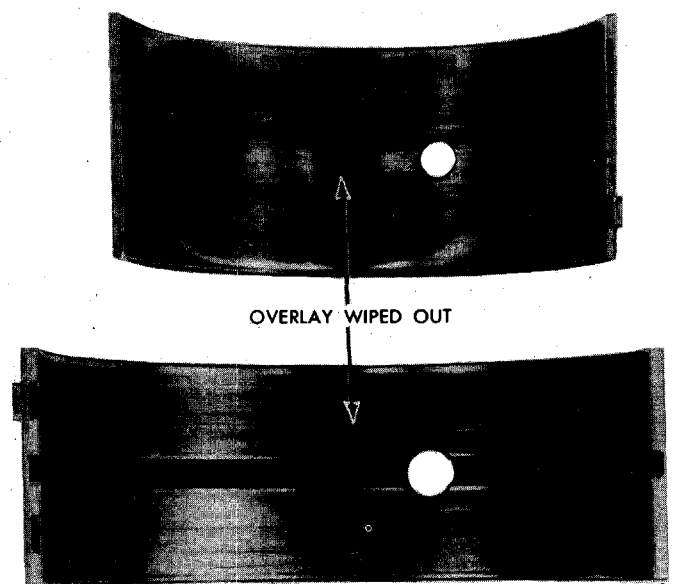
Bearing Failure Due to Lack of Oil
